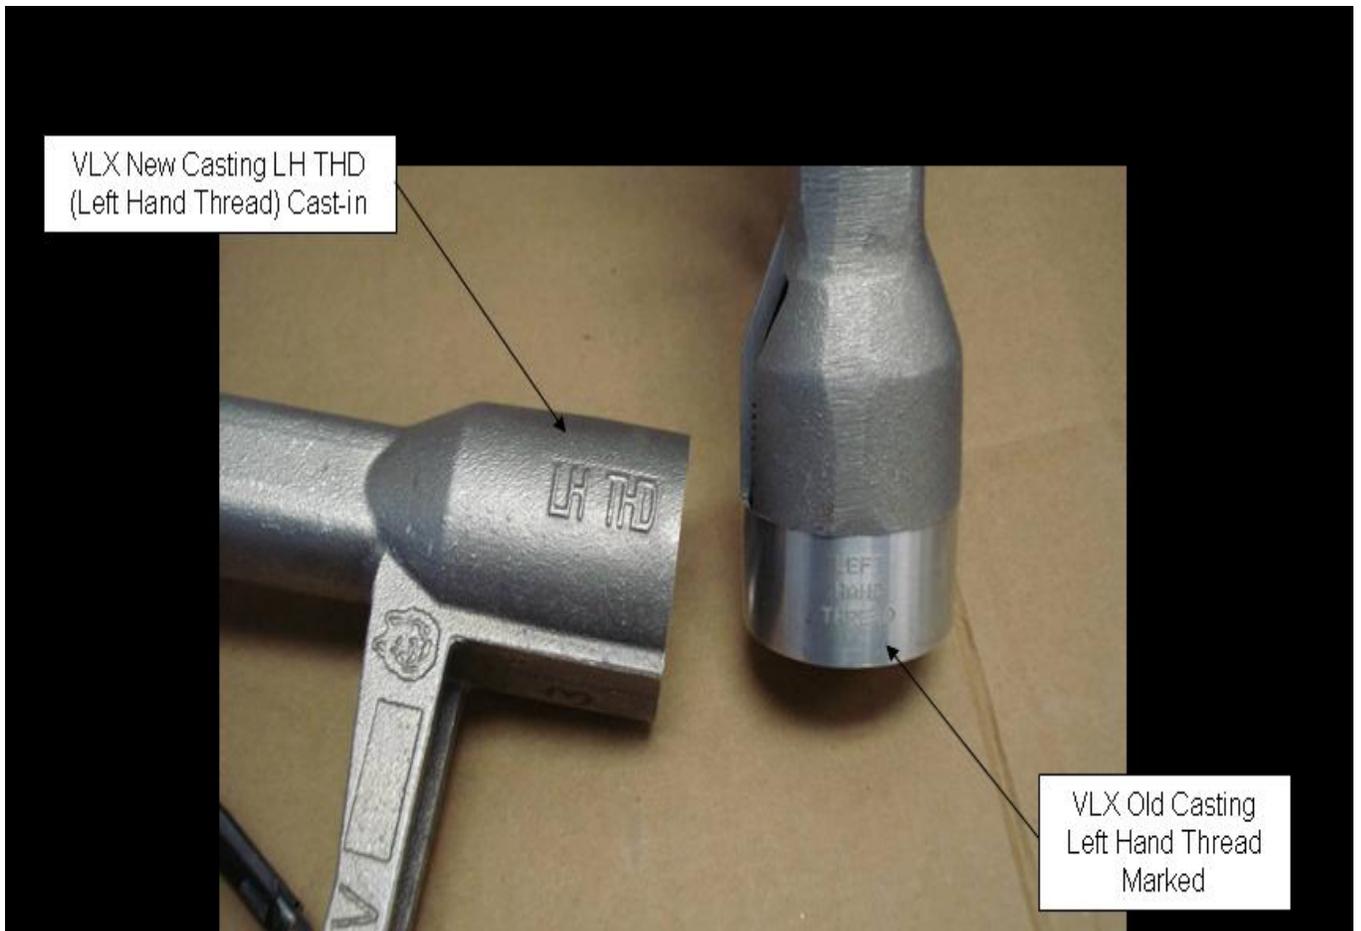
Old vs. new casting for Husky VLX nozzle – view of connection to hose.
